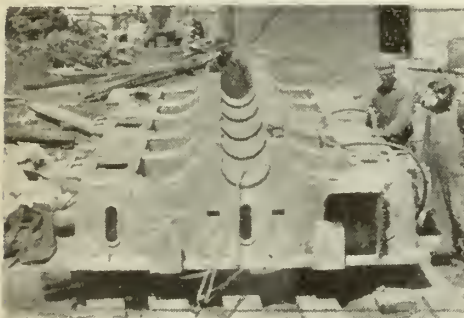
END VIEW OF MARINE ENGINE BED PLATE. NOTE WEIGHT ON CASTING.
